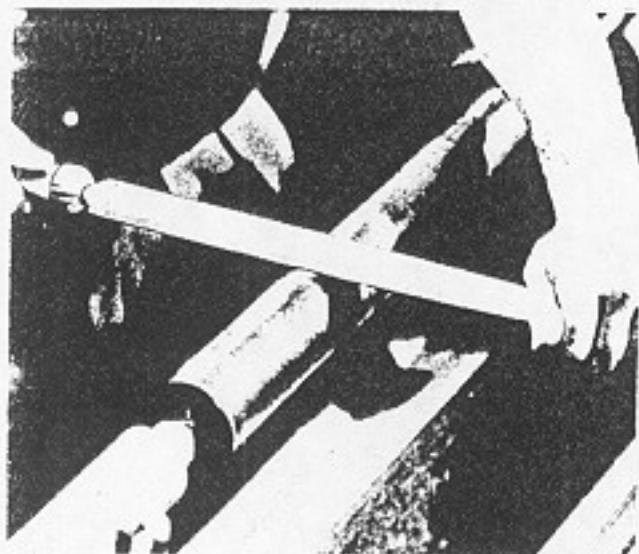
A file handle should always be used in filing at a lathe. (Courtesy Nicholson File Co.)
